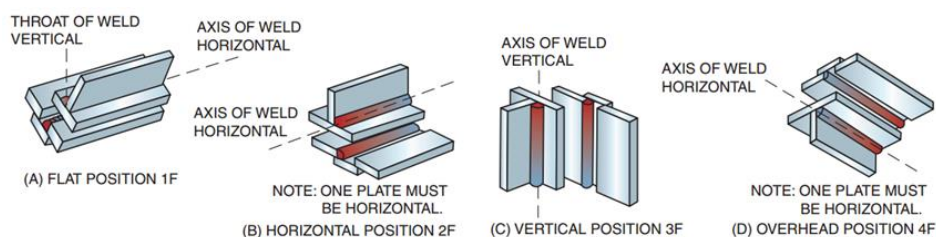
Positions of welding - fillet welds (adapted from Jeffus, 2011)
